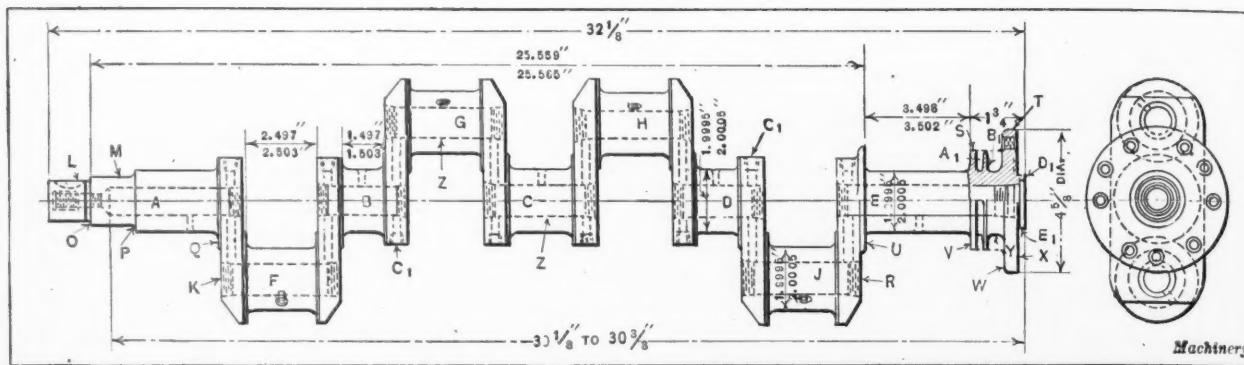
Four-throw Crankshaft used in Lincoln Eight-cylinder V-type Automobile Engine
